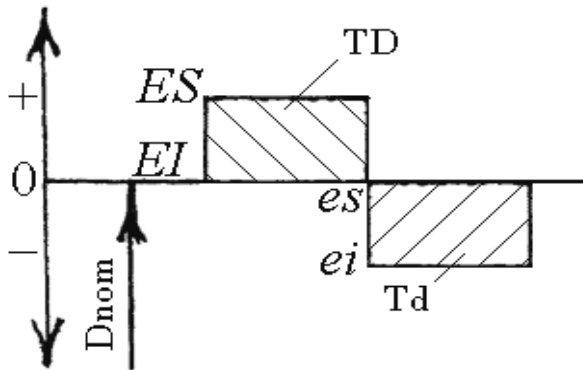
The schematic showing of fields of the tolerances of hole or shaft
